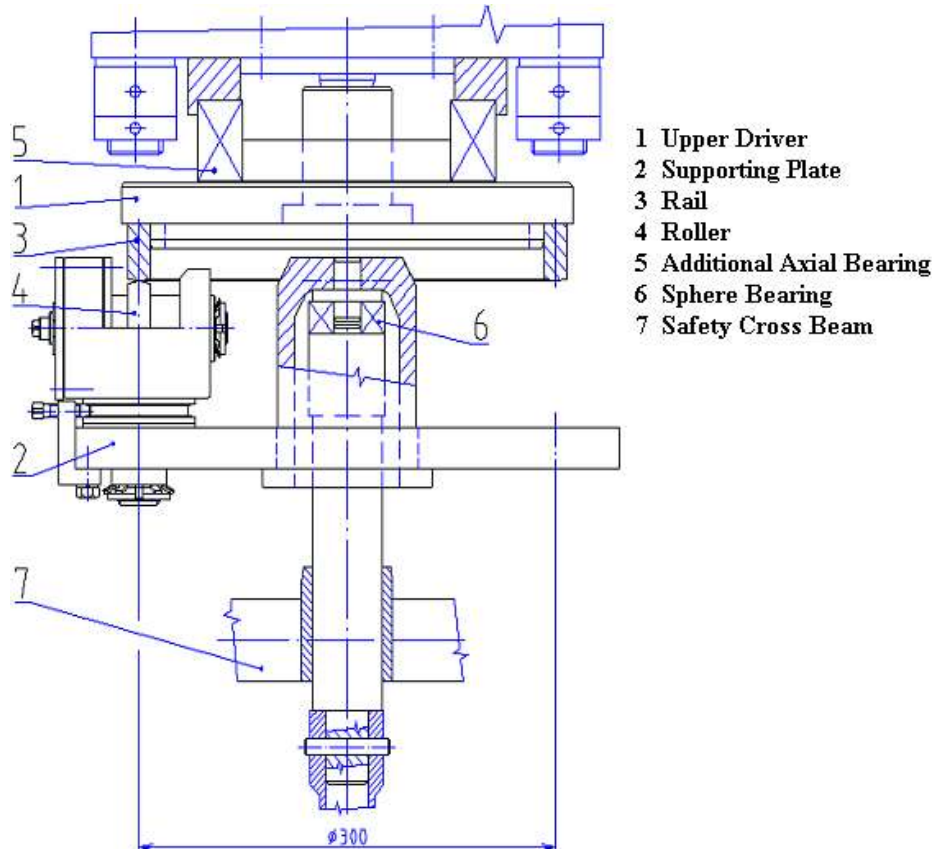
Diagram of the Machine for Contact Fatigue Tests.
